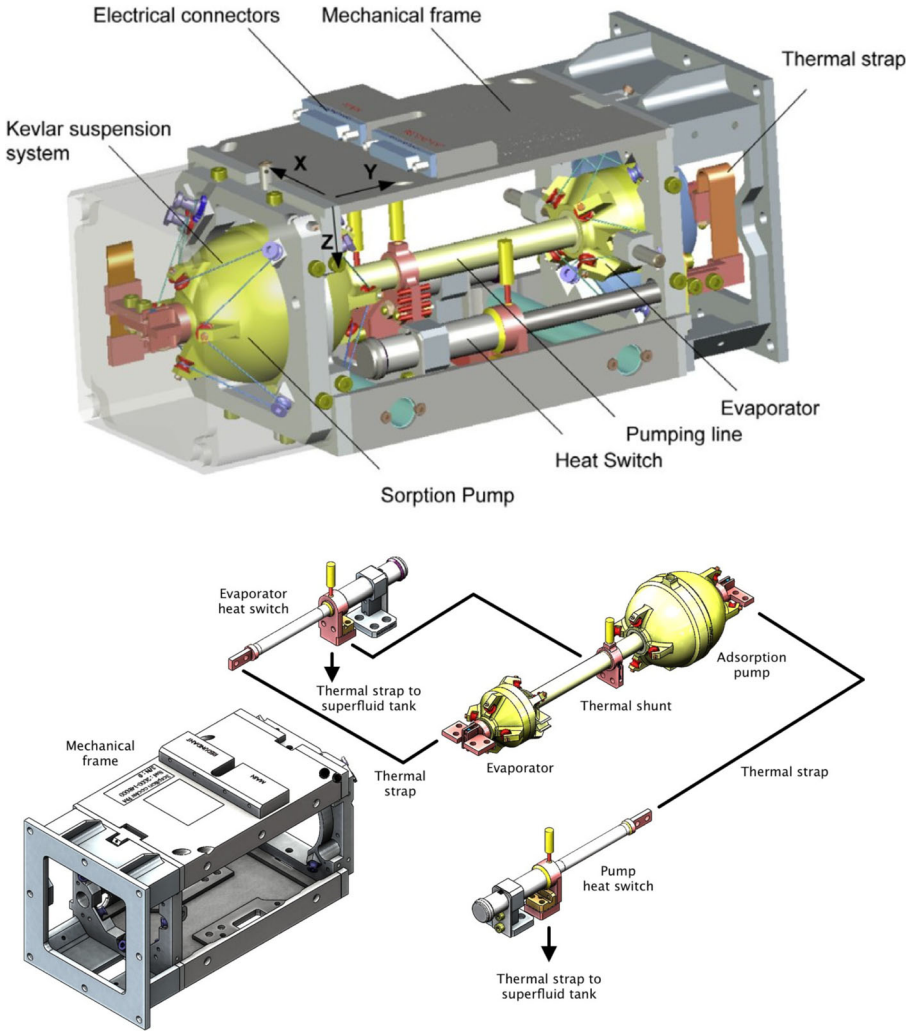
Overall 3D views of the PACS cooler identifying its main components from [4]. The *bottom* figure presents an exploded view identifying the elements represented schematically in Fig. 2
